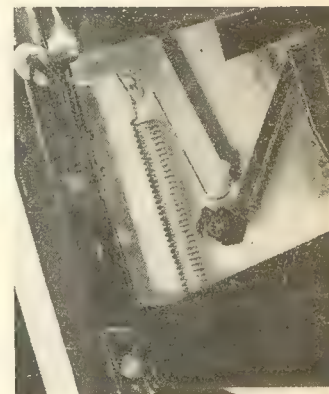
Shows lower oven panel removed as referred to in Fig. 1 giving access to door hinge assembly and springs. When grilling in oven, door is held ajar by quadrant catching on roller.
